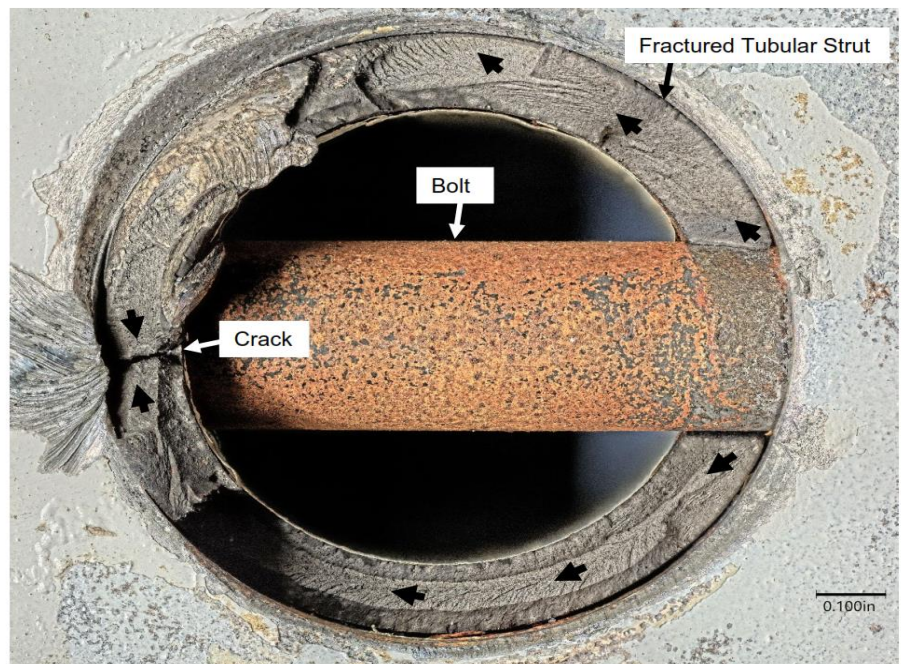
Fracture face of the tubular strut after cleaning with Alconox showing the general direction of fracture propagation (indicated by arrows). This is the fracture face on the side of the axle.
